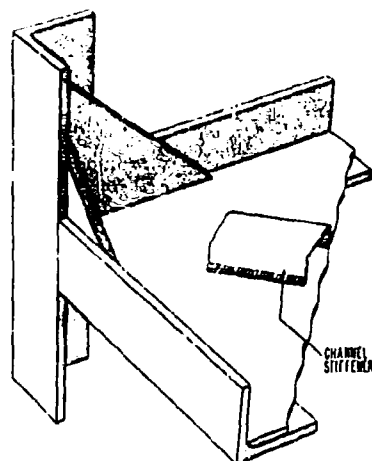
Torsion plate or divider with welded channel stiffener
